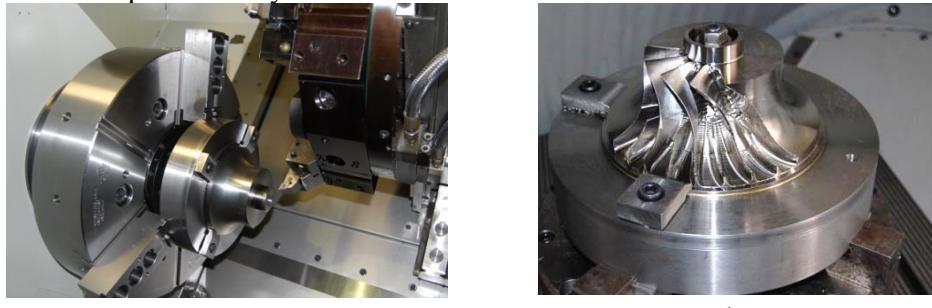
Clamping of impeller using unique fixture at: turning (a); milling (b)
